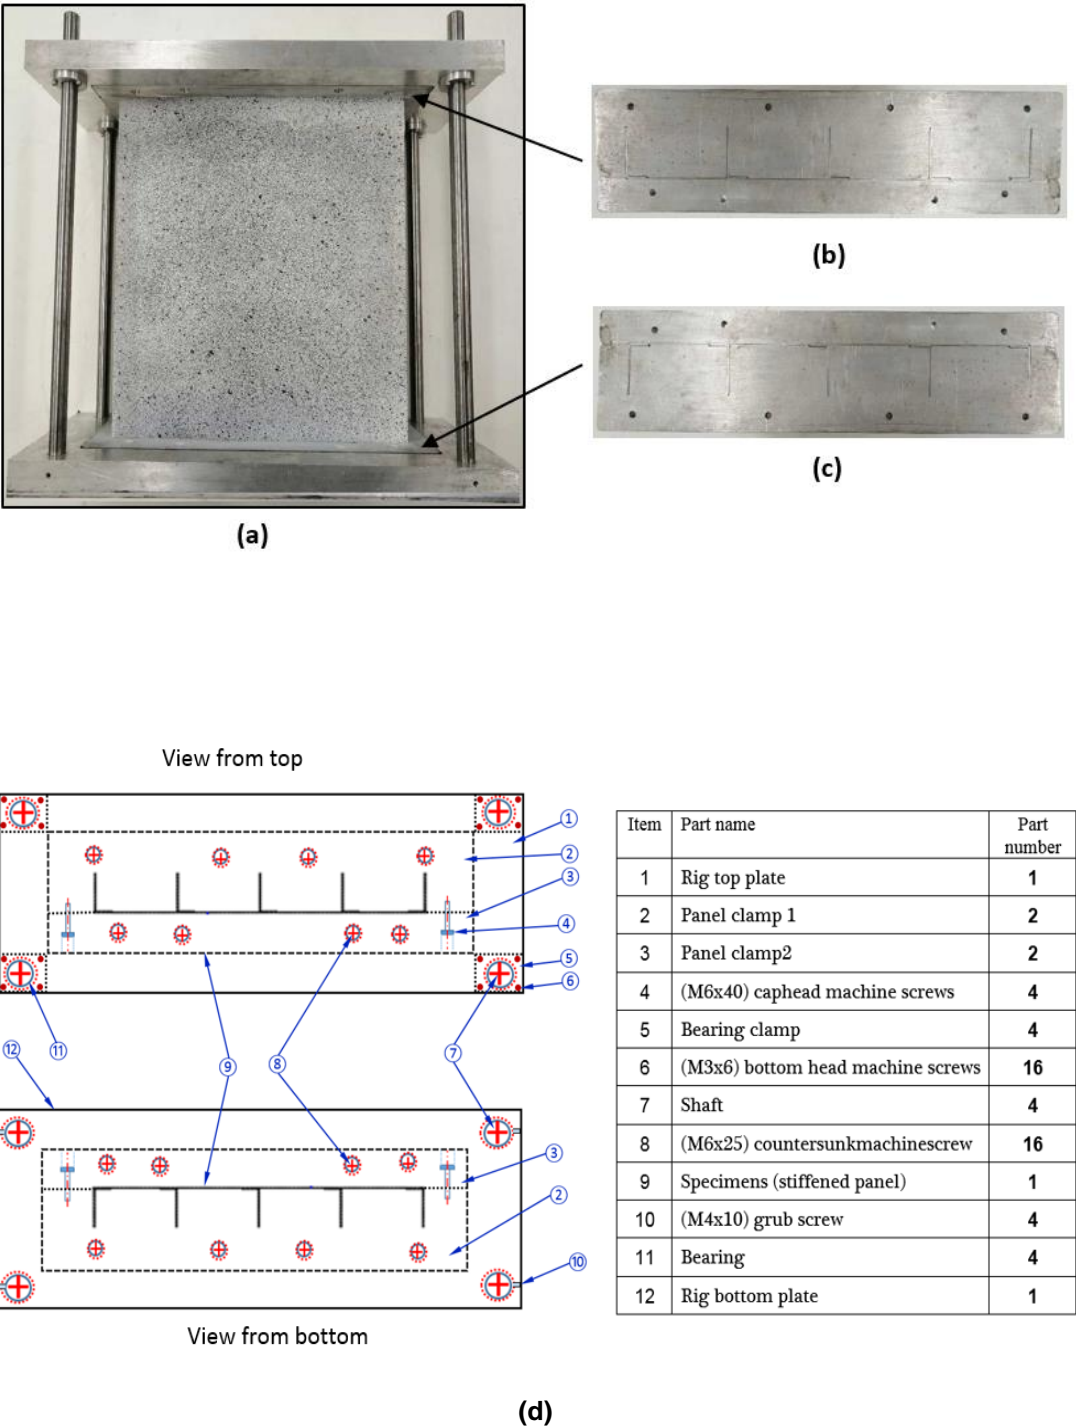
(a) Specimen mounted in the test rig, (b) Top clamp with specimen inserted, (c) Bottom clamp with specimen inserted, (d) clamp details
